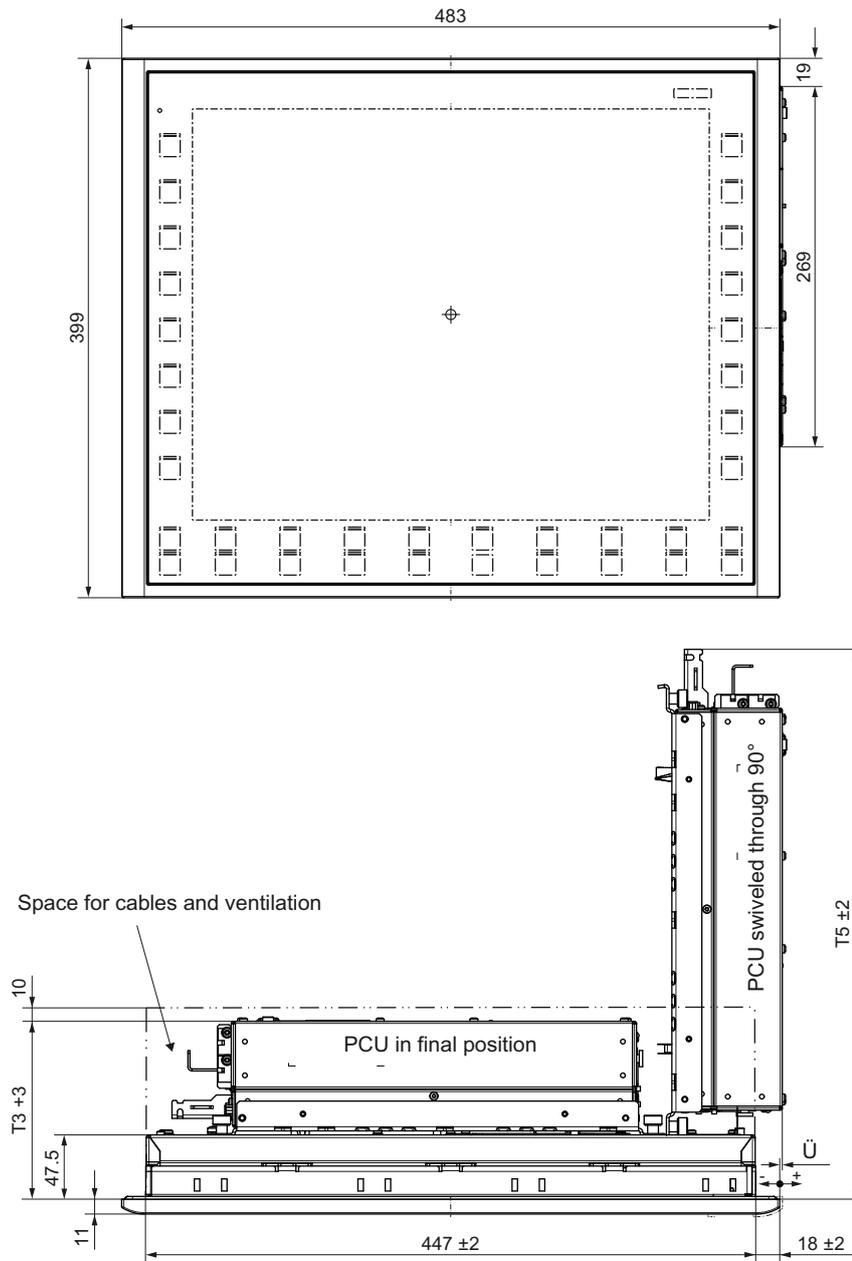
Mounting the PCU onto the operator panel front OP 019
